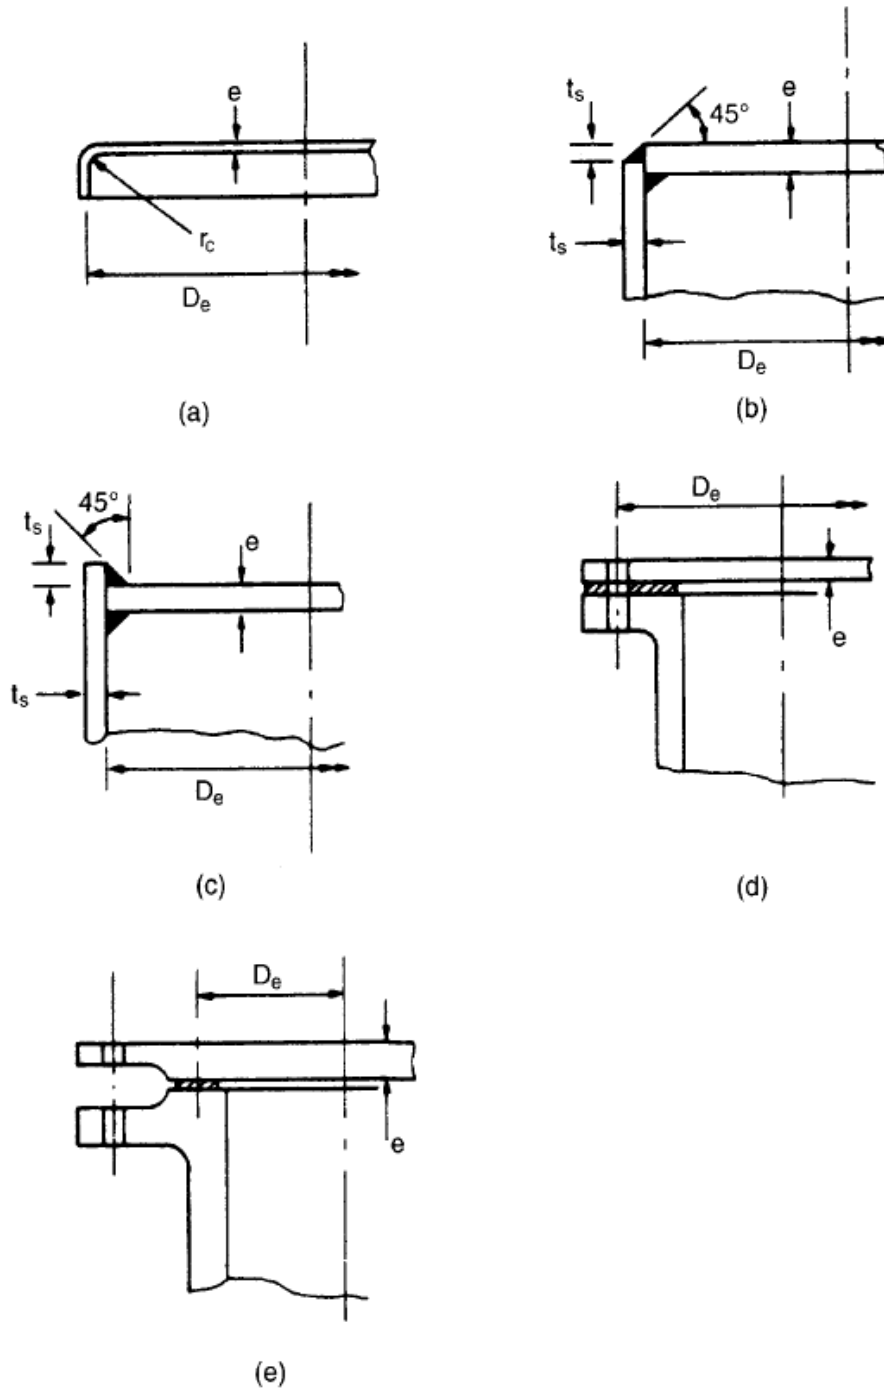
Flat-end closures (a) Flanged plate (b) Welded plate (c) Welded plate (d) Bolted cover (e) Bolted cover
